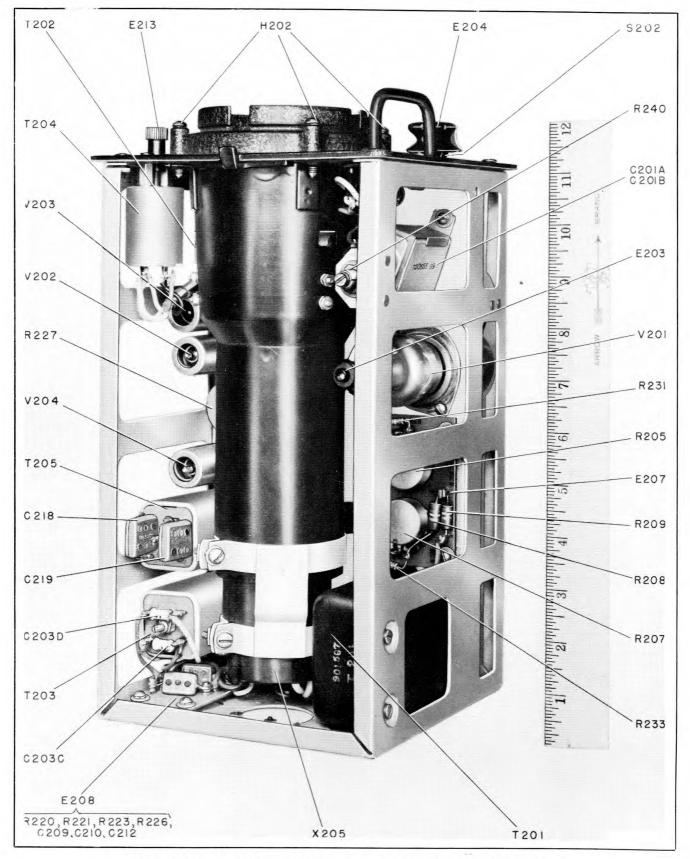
Indicator I-152-C - Chassis Top View (Right Oblique)
